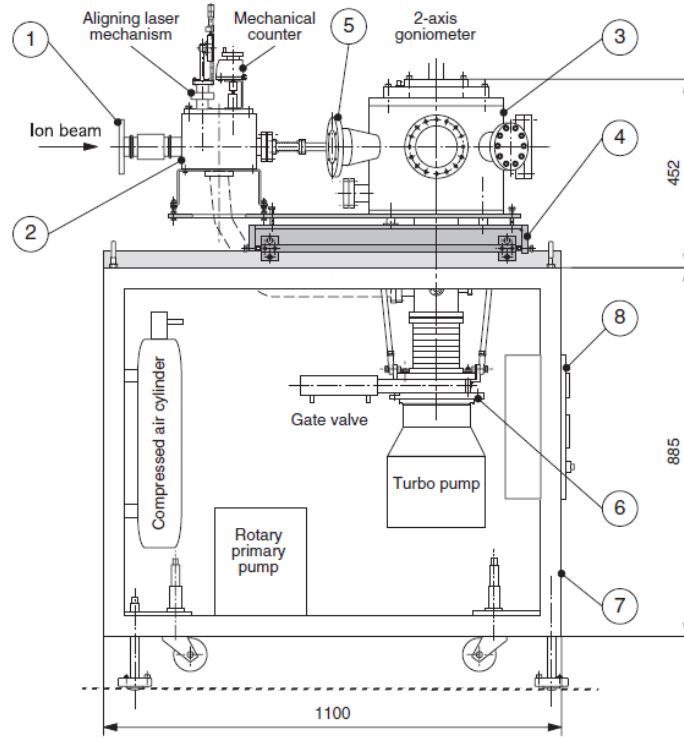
Schematic view of the EC chamber assembly with dimensions in mm: (1)ISOLDE beam-line flange, (2)collimation block, (3) experimental chamber, (4) XZY sliding orientation cradle, (5)detector flanges, (6) vacuum block, (7) movable supporting frame stand with wheels and adjustable supporting pads, (8) auxiliary control equipment panel. [53]
